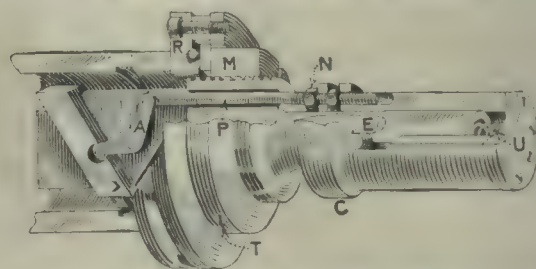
ATTACHMENT FOR CUTTING THE DOVETAIL
